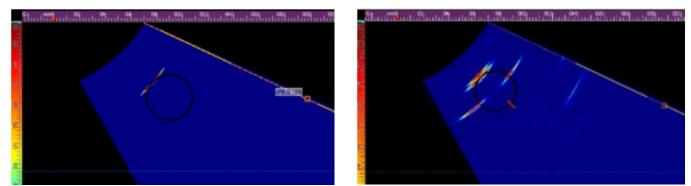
½ skip inspection, Left image shows a bolt hole with no defects, Right image shows a bolt hole with cracking on both sides
